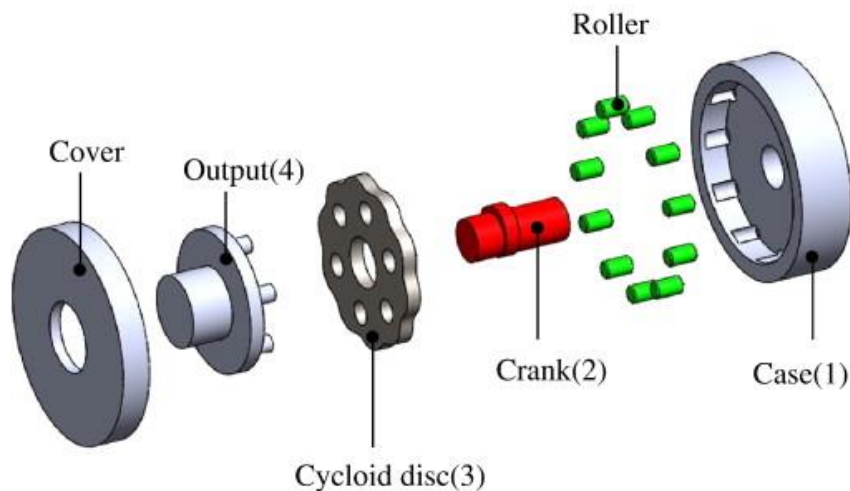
Exploded View of Simplified Cycloidal Drive [8]
